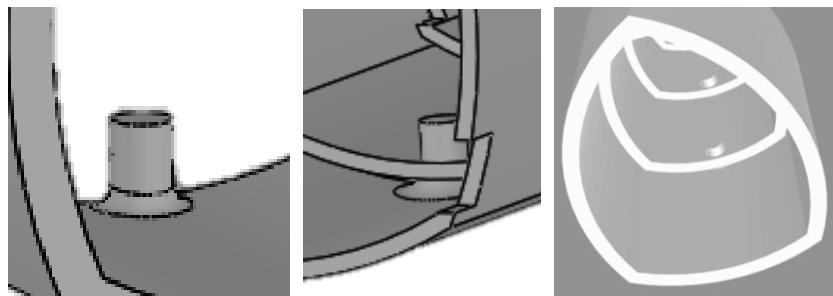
“Print & Play” connection points to attempt to eliminate manual assembly.
